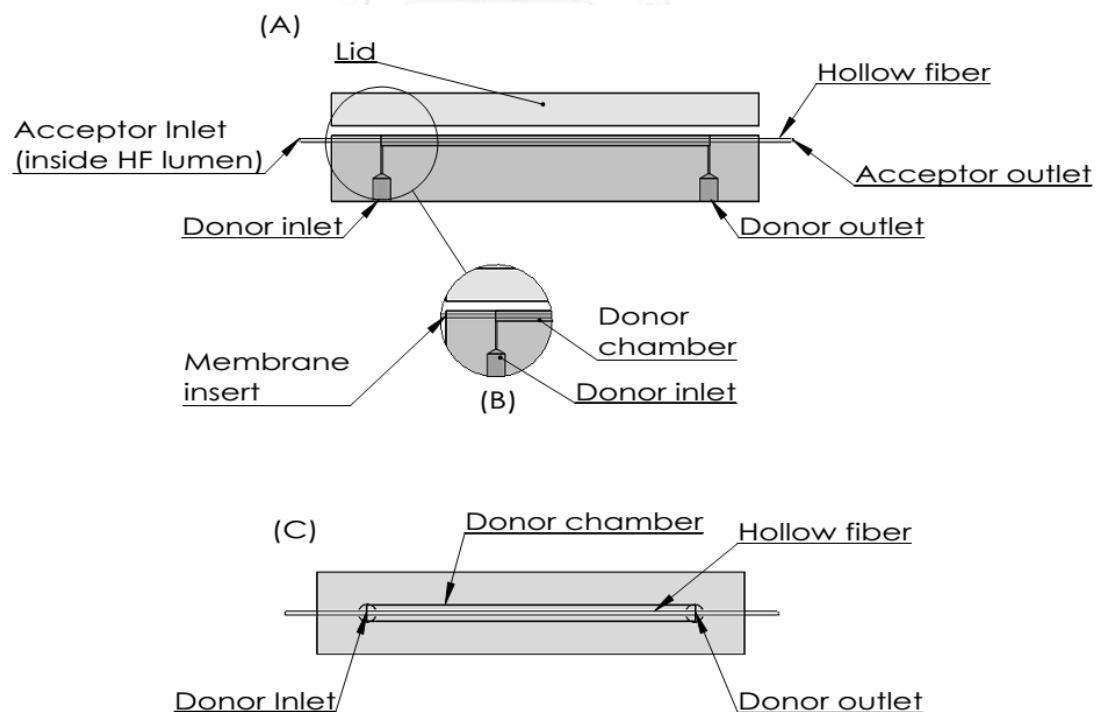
The first design of easy assemble hollow fiber membrane unit A) side view B) zoom at connector C) top view
